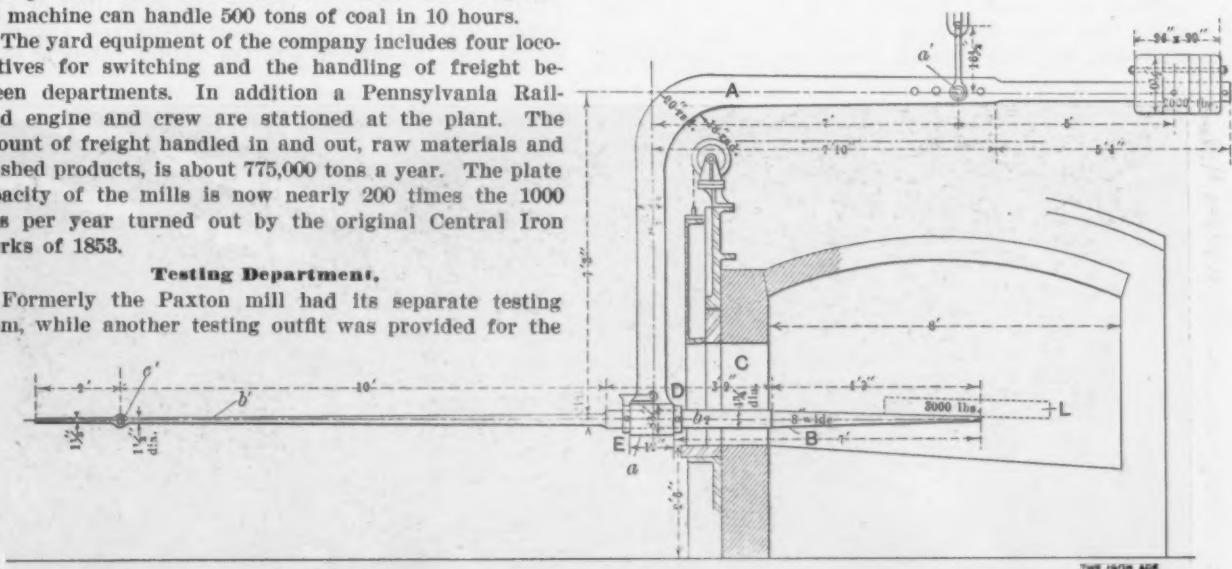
Section through Heating Furnace and Guss Peel for Charging and Drawing.
